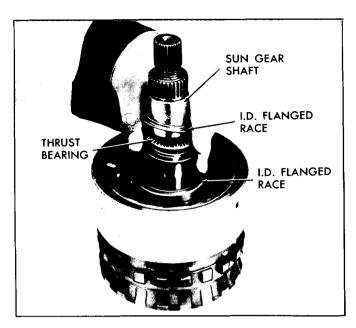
E-172 Installing Bearing and Races on Sun Gear Shaft
